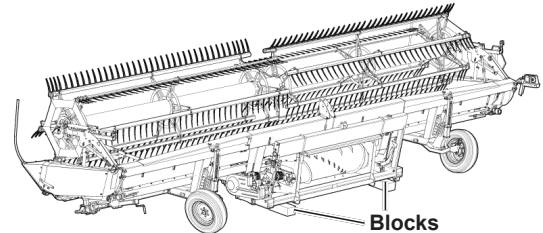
Support Rear With Blocks OR Gauge Wheels
